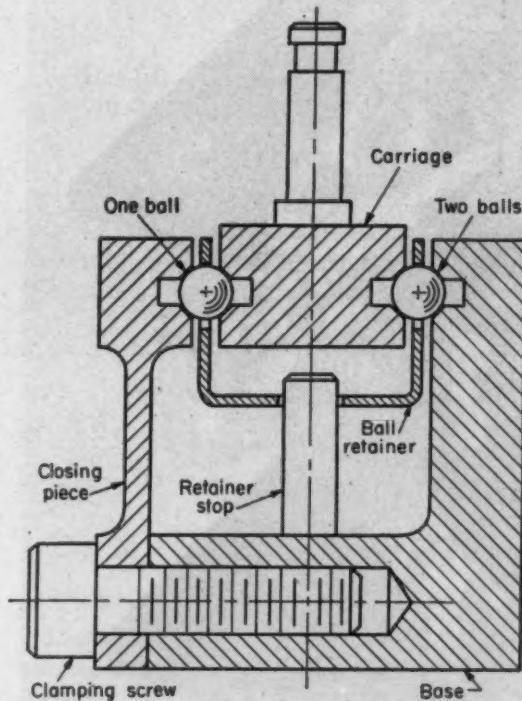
Right—Detail of three-ball slide used in cavity-tuning mechanism
